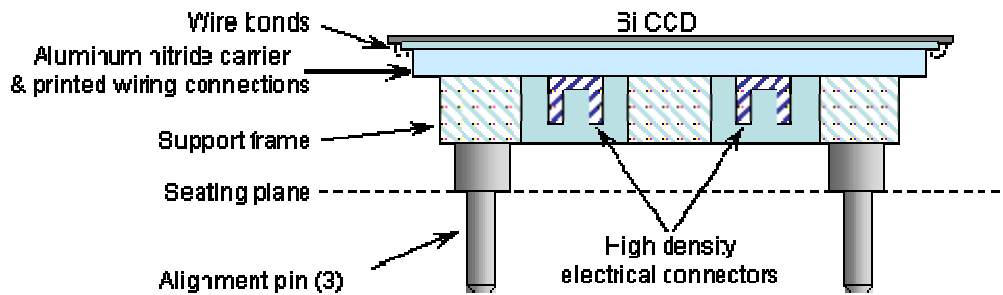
Proposed sensor package showing a CCD on aluminum nitride carrier with electrical and mechanical interfaces.
